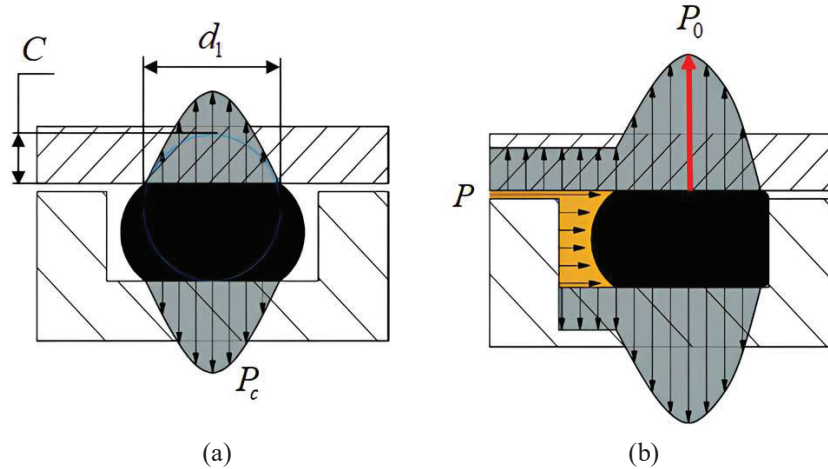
Sealing mechanism for static O-rings (a) Initial compression of the seal (b) Seal under pressure of the fluid to be sealed.
